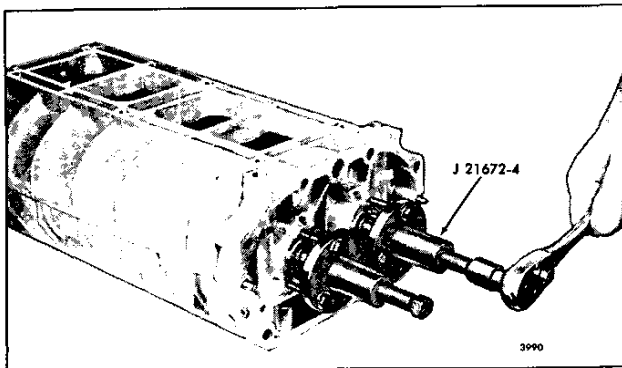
Removing Blower Rotors from Front End Plate Ball Bearings (Former Blower) Using Tool J 21672-4
